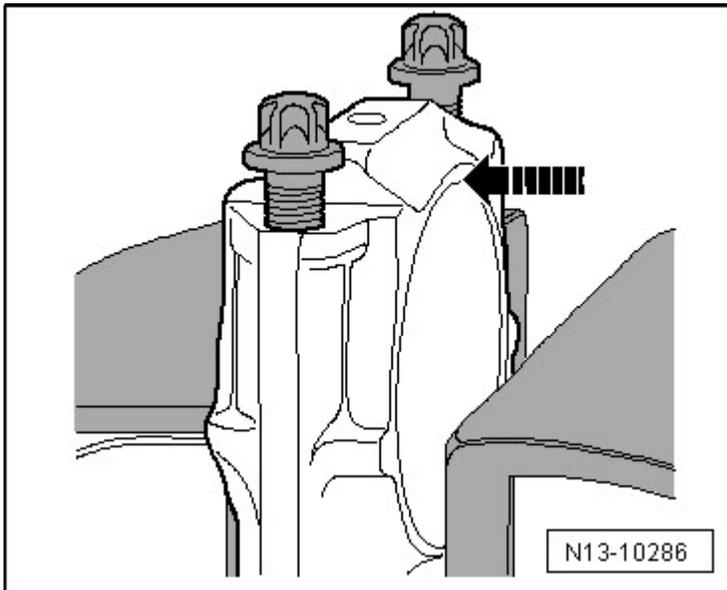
Carefully Tapping Against Connecting Rod Bearing Cap
